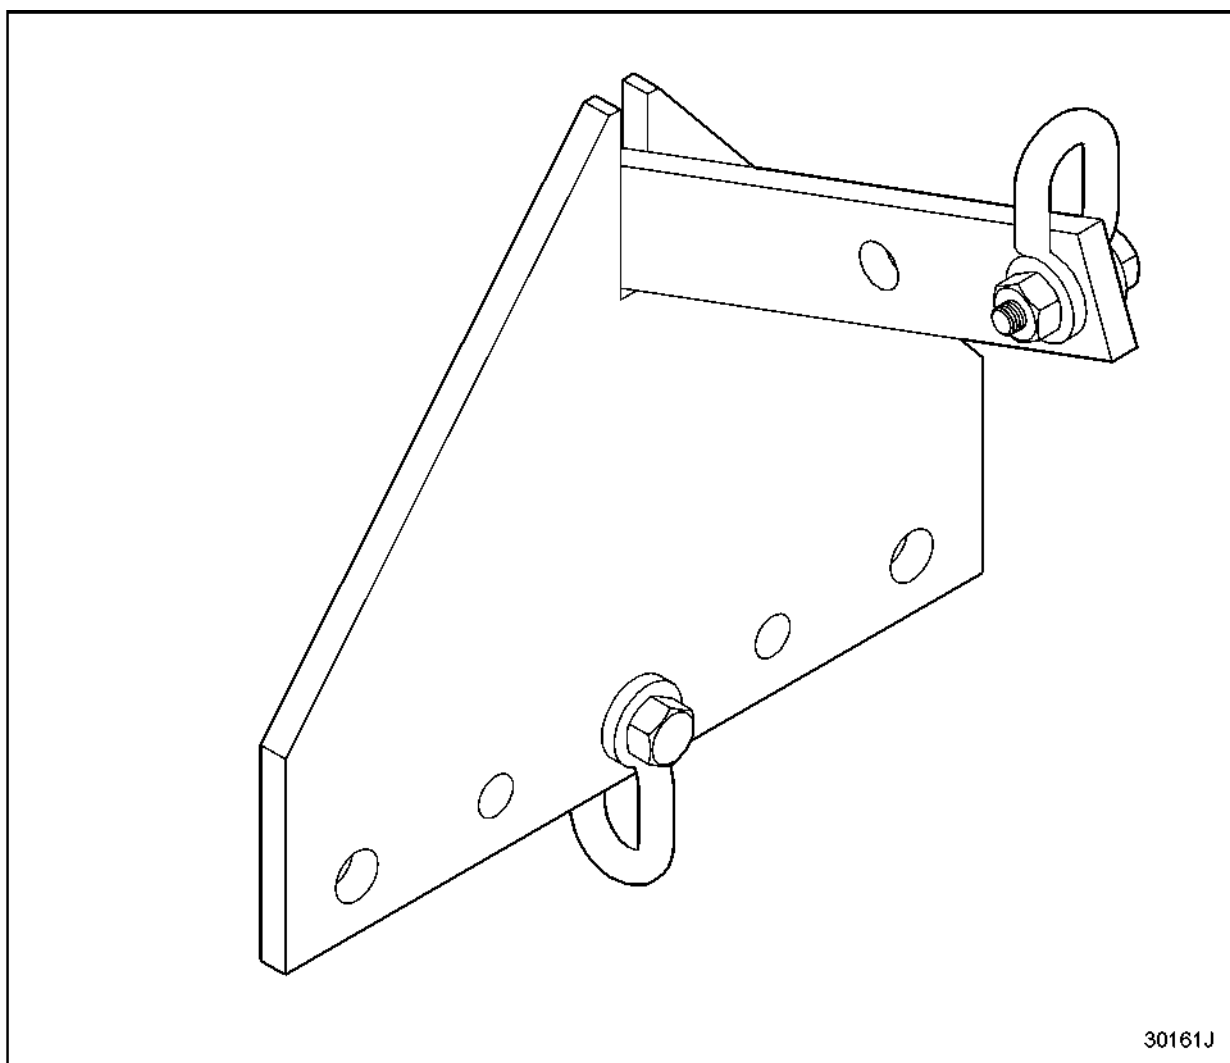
Cylinder Head Lifting Fixture,J 22062-01
